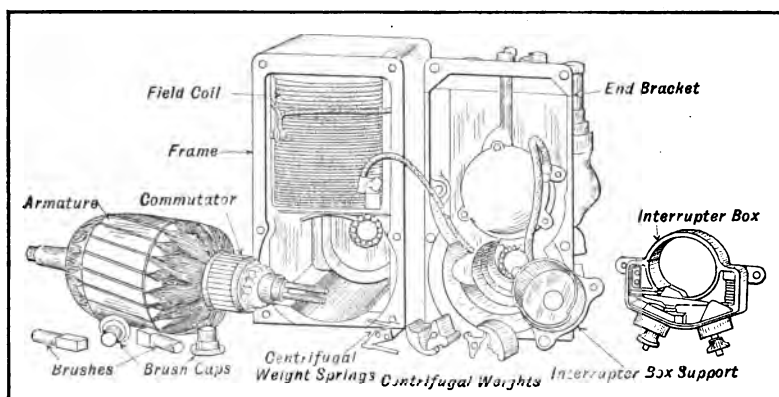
View Showing Construction of Westinghouse Ignition Generator.
